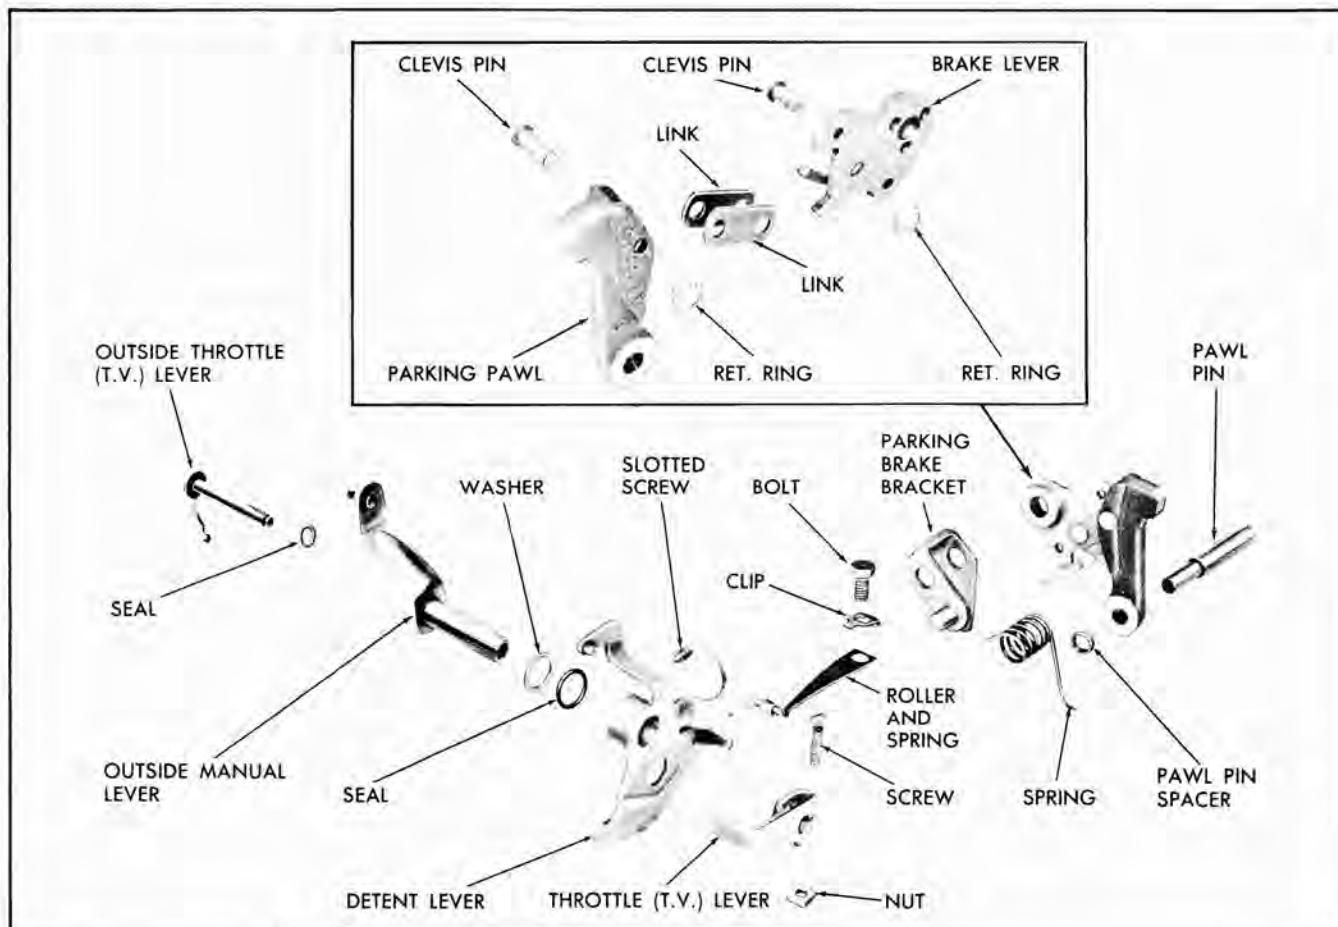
Throttle, Manual, and Parking Parts—Exploded
